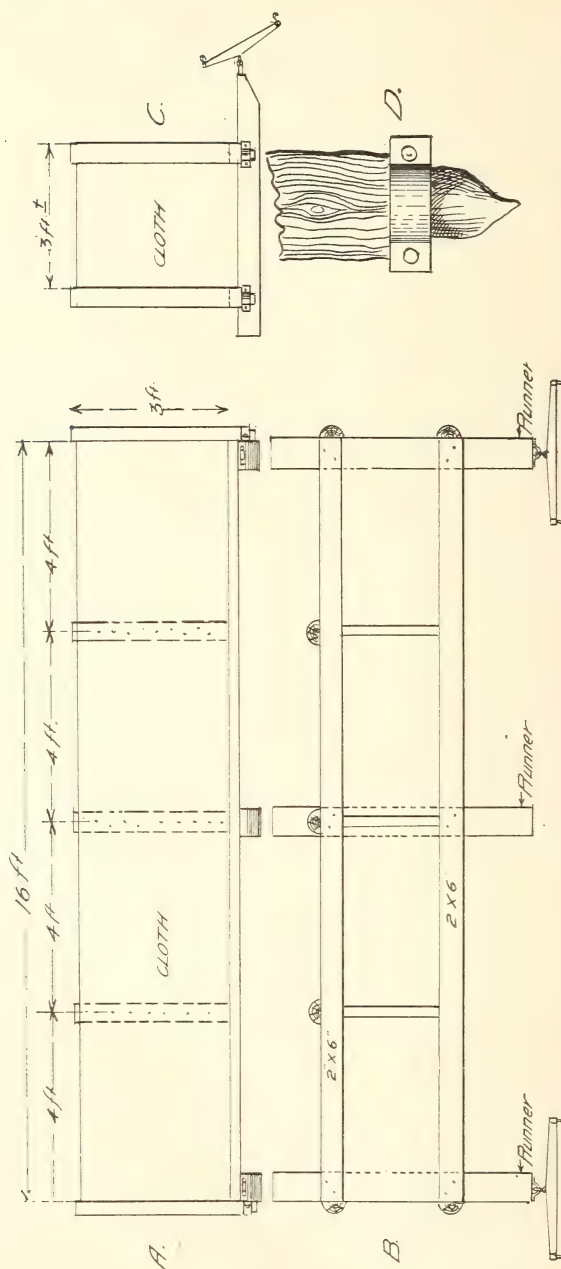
A, Front view; B, Plan view; C, End view; D, Detail of strap fastening for uprights
